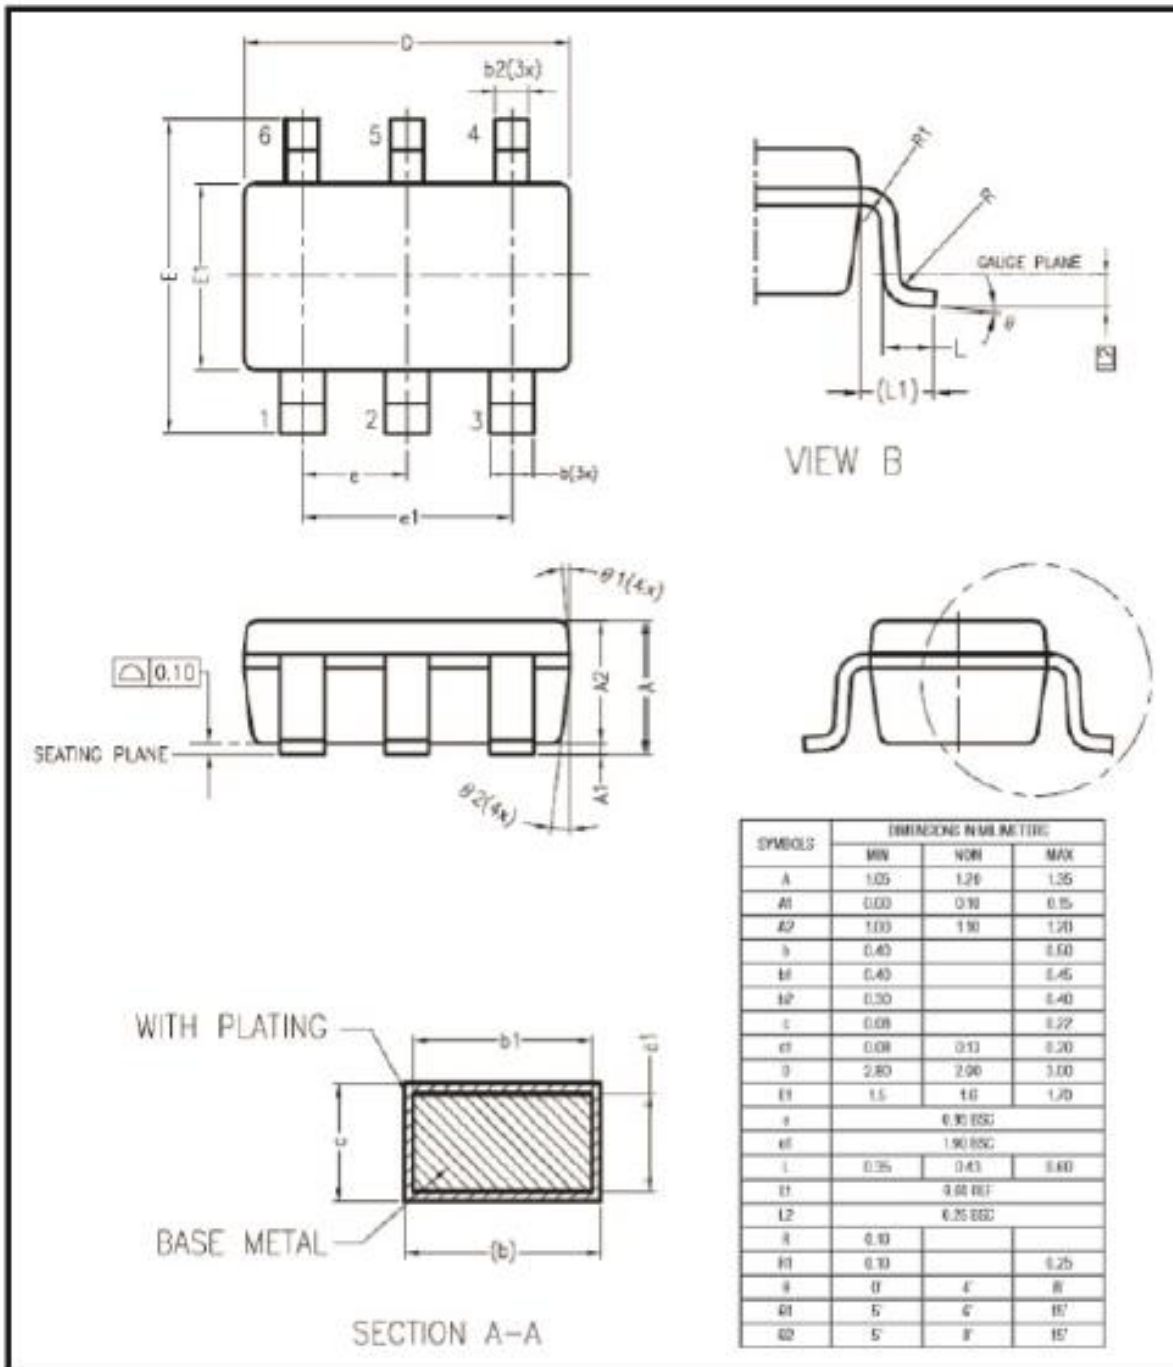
Package dimensions of CT219 TMR sensor by Crocus Technology
